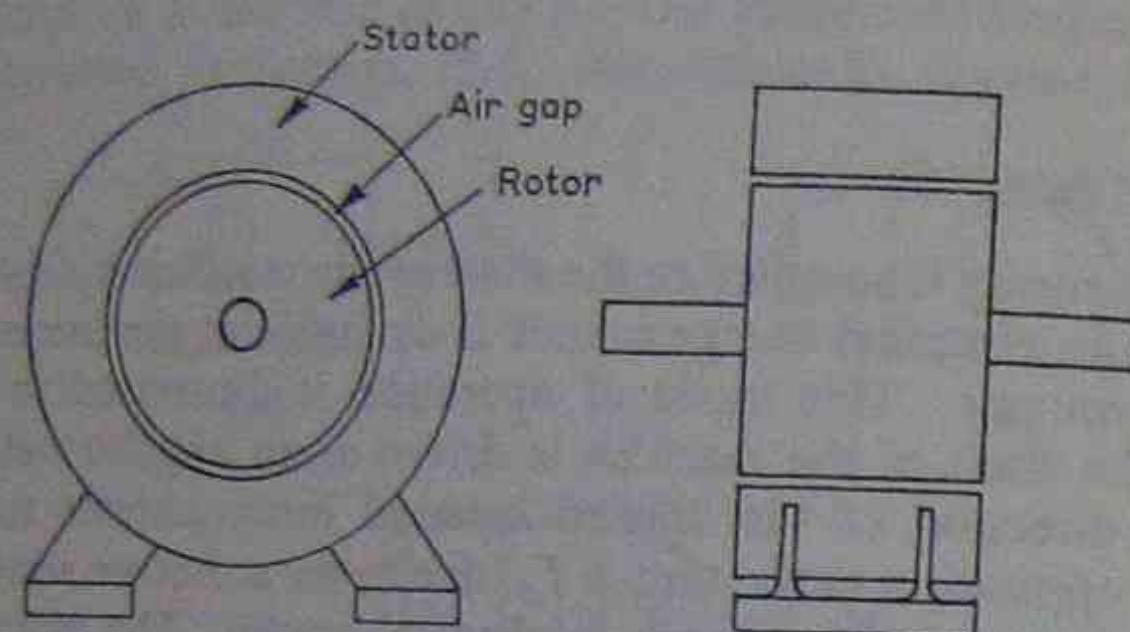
BASIC ARRANGEMENT OF A ROTATING MACHINE
